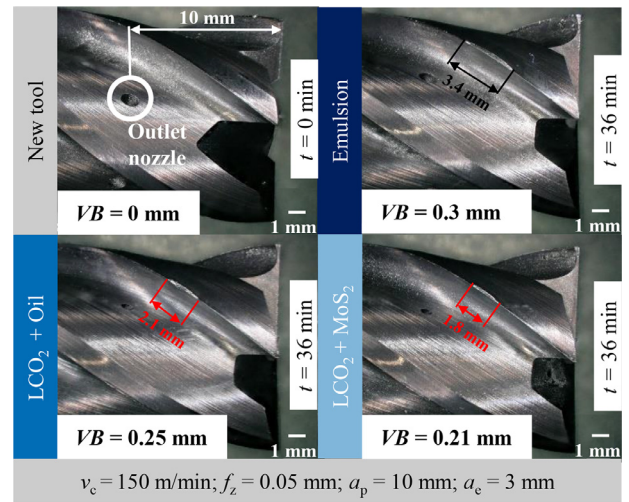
Tool wear comparison for cooling and lubricating techniques.
